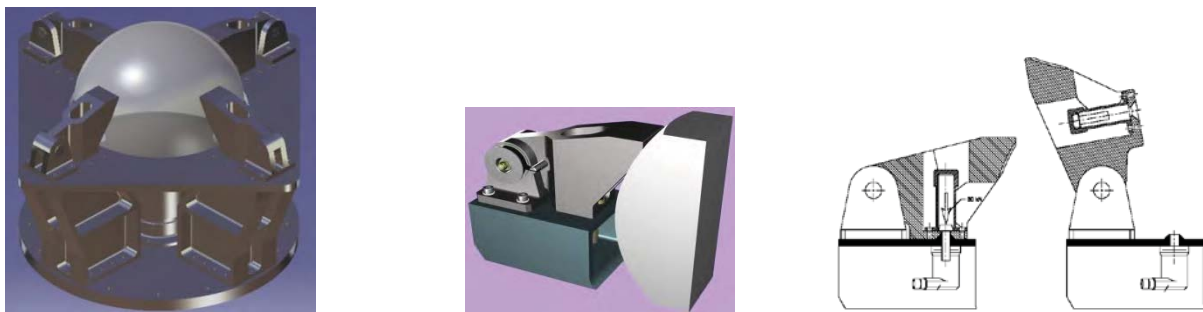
Clamp Solution assembly on left. Clamp detail in the center. Clamp section in open and closed configuration on right
